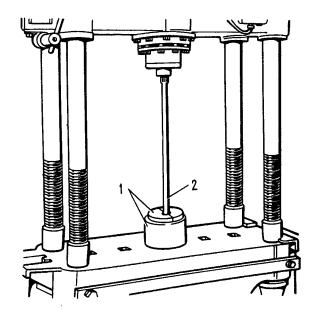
Pressing Out Axle-Shaft Bearing Lock-ring:
